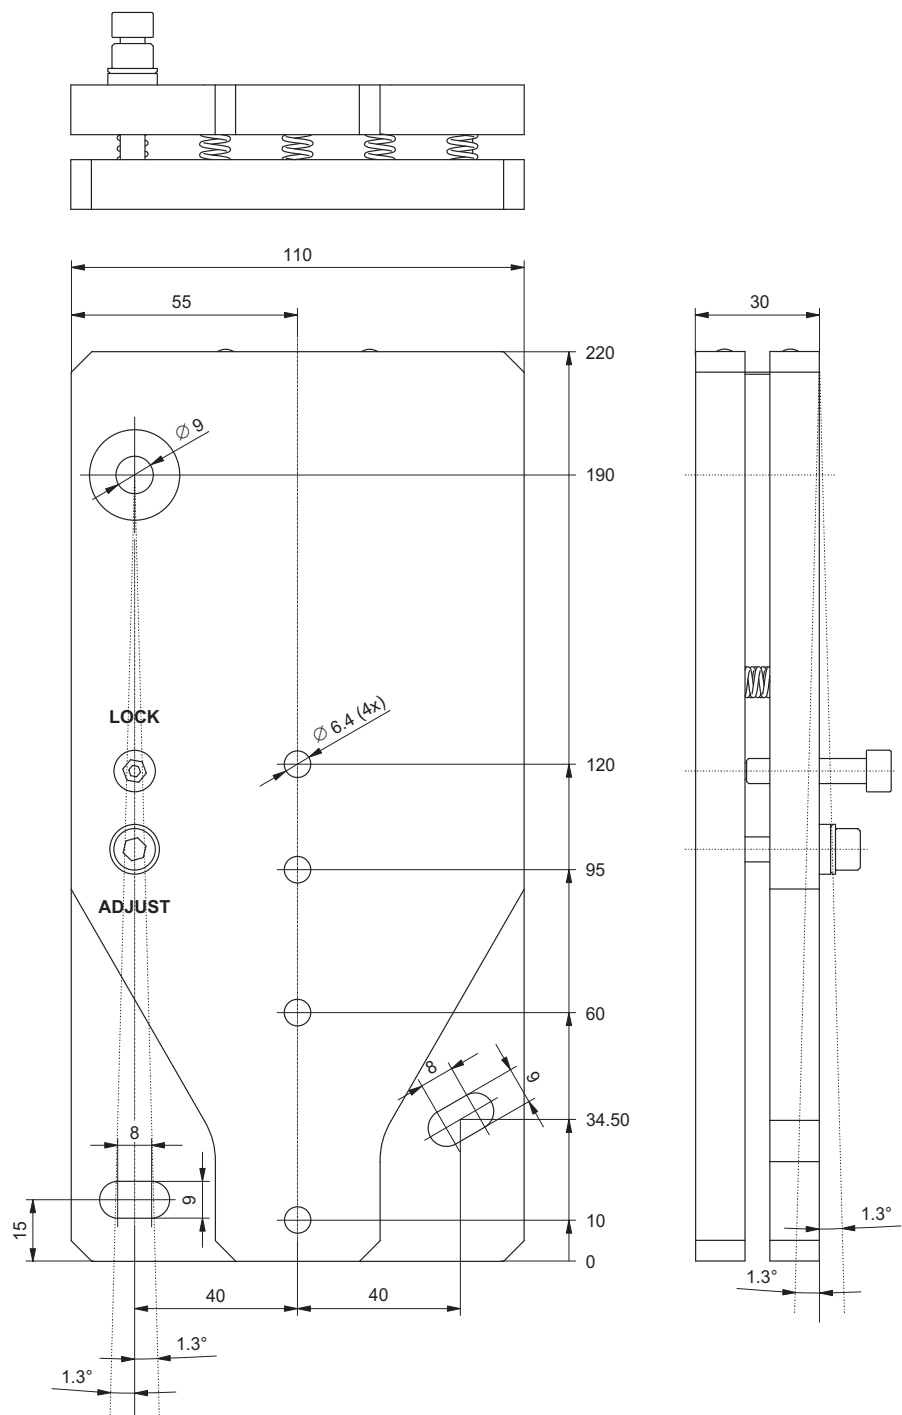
Views of the mounting plate VIB-A-P07 (Dimensions not specified are given in mm)
